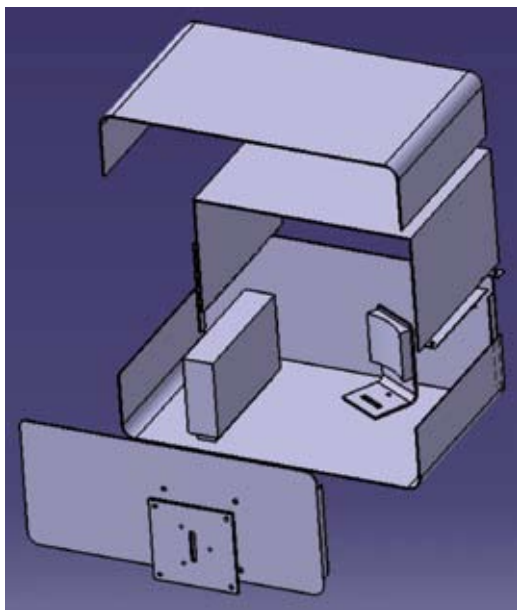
Exploded assembly drawing of the spectrometer comprising the internal and external body, the mounted holographic grating and the CCD line sensor.
